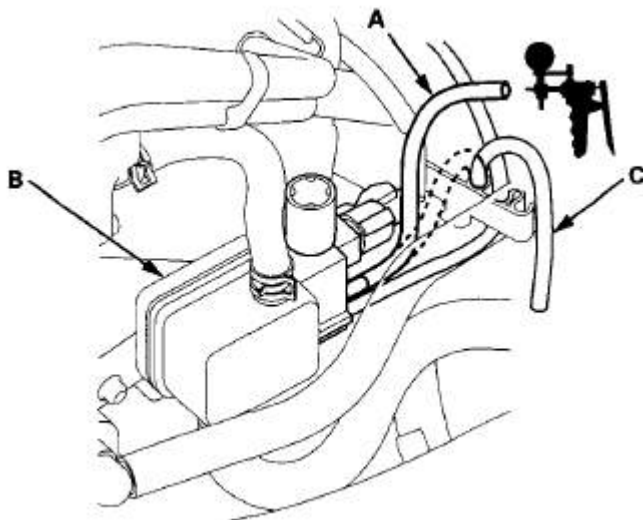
Identifying Vacuum Hose, Engine Mount Control Solenoid Valve And Vacuum Pump
